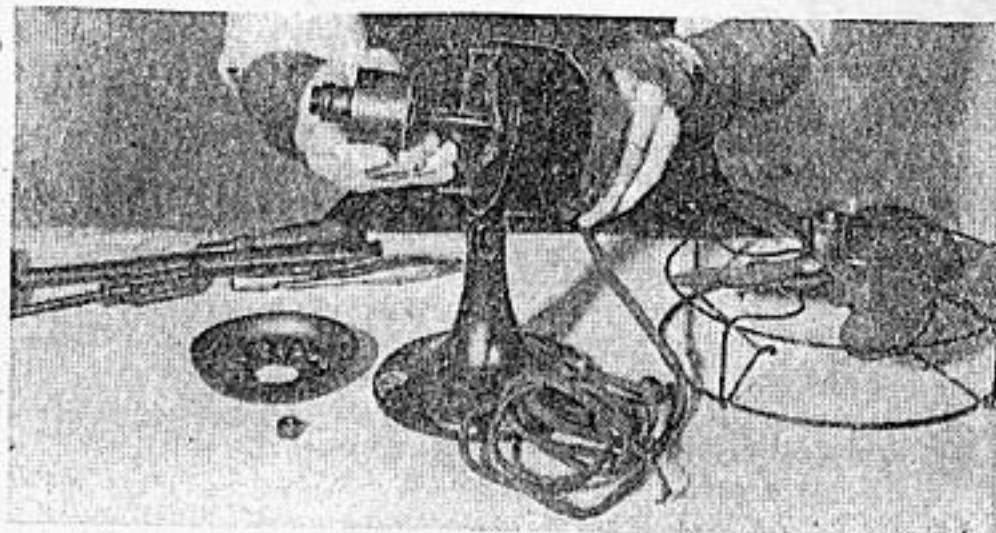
Here the fan is being taken apart for cleaning and inspection. The rotor turns on a hollow fixed shaft.
